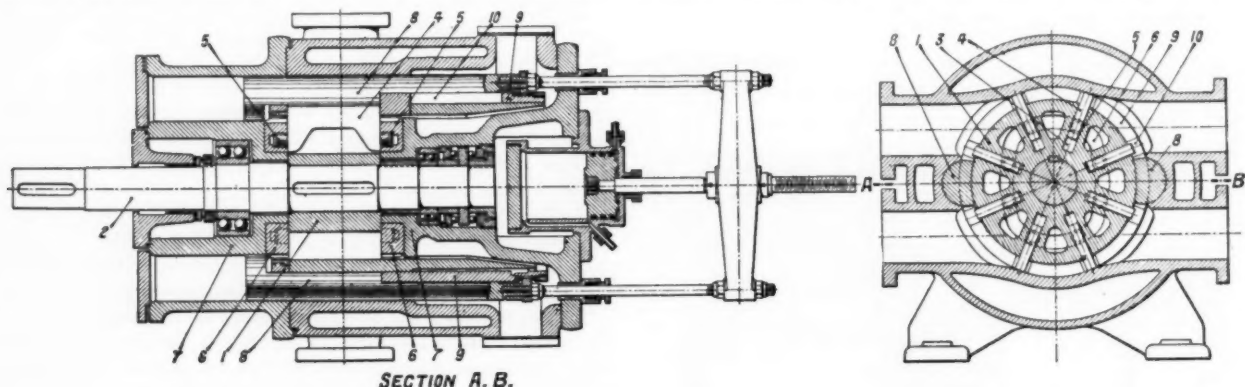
SCHWARZKOPFF-HUWILER ROTARY SLEEVE VALVE INSTALLED ON A DIESEL-ENGINE LOCOMOTIVE
